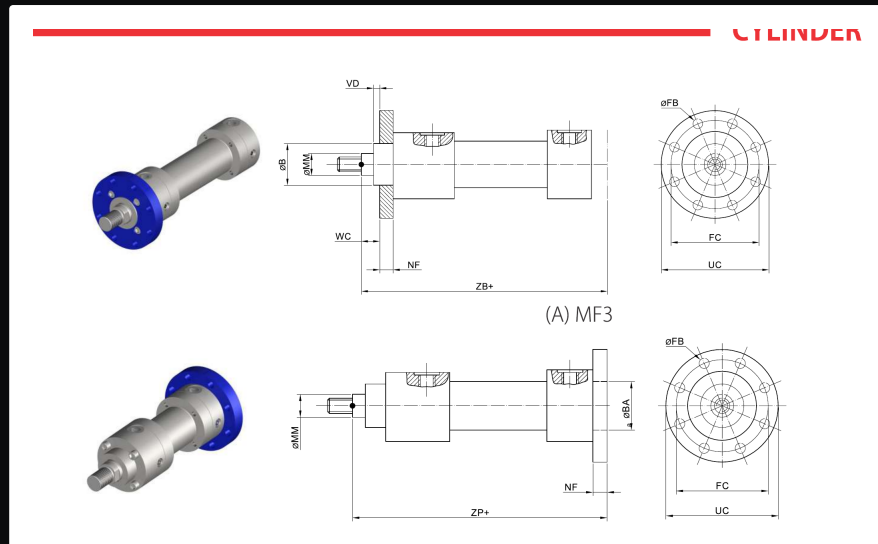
MF3 HEAD CIRCULAR FLANGE, MF4 CAP CIRCULAR FLANGE
